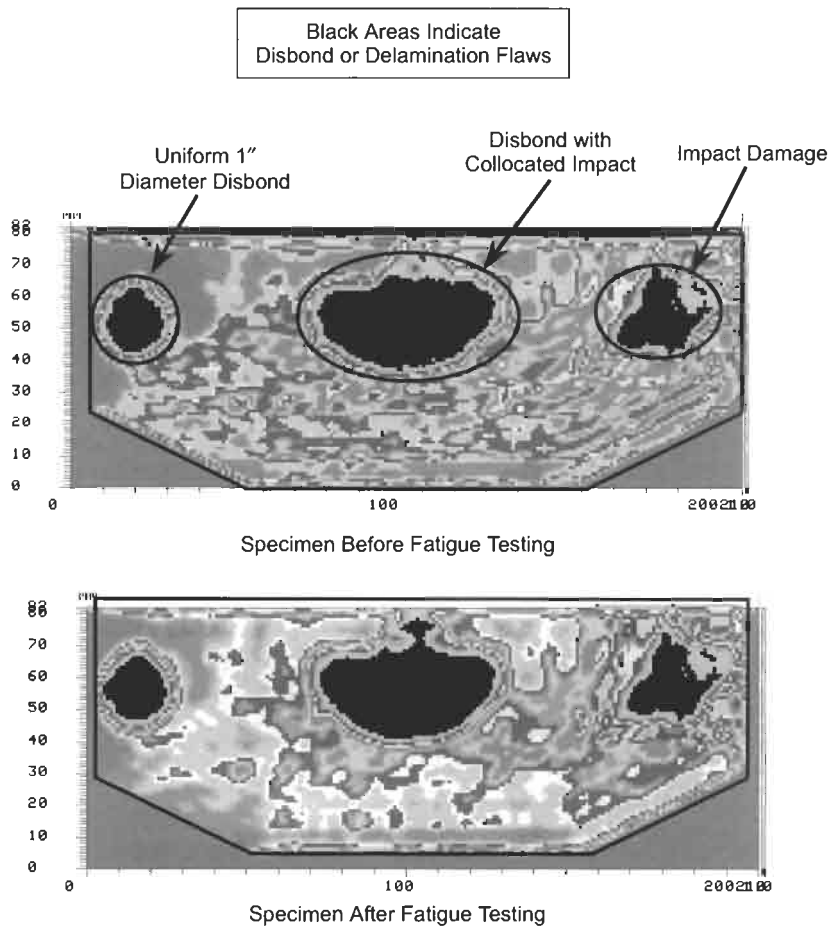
Fatigue specimen lock19 (configuration BE-9) flaw profile before and after 144000 fatigue cycles; no change in flaw profile after four L-1011 fatigue lifetimes.
